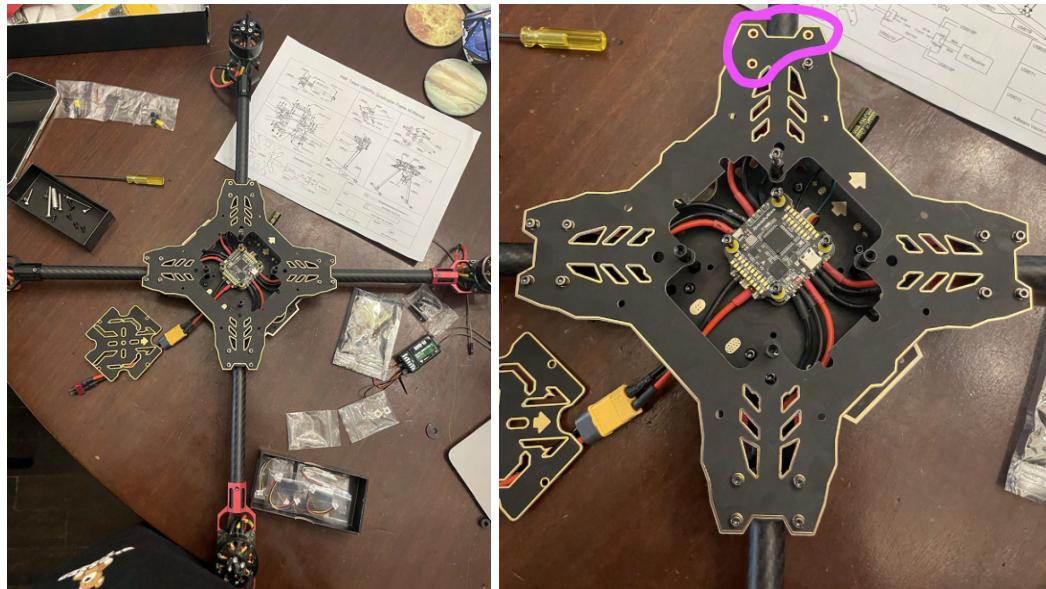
Drone frame assembled with motors (top image); zoomed in picture to show the circuitry for the motors and battery with the three screws that were missing circled in pink (bottom image)
